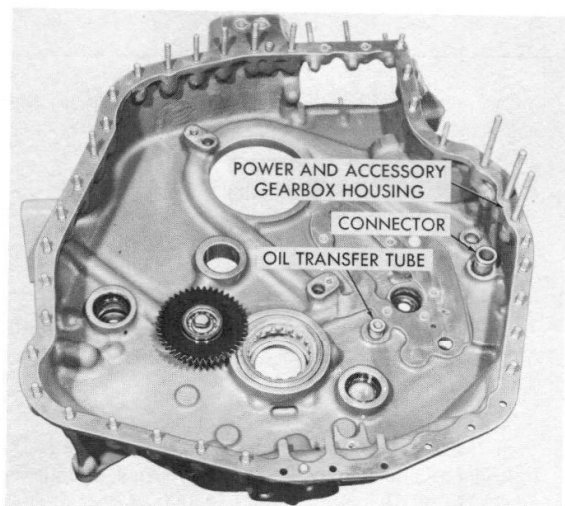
Q. Oil Transfer Tubes in Gearbox Housing
